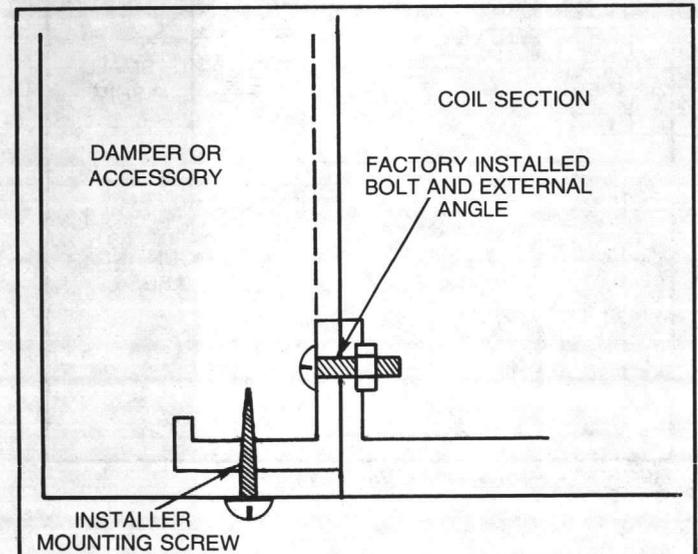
Mounting Side View of Non-Flange Section to Coil Section
